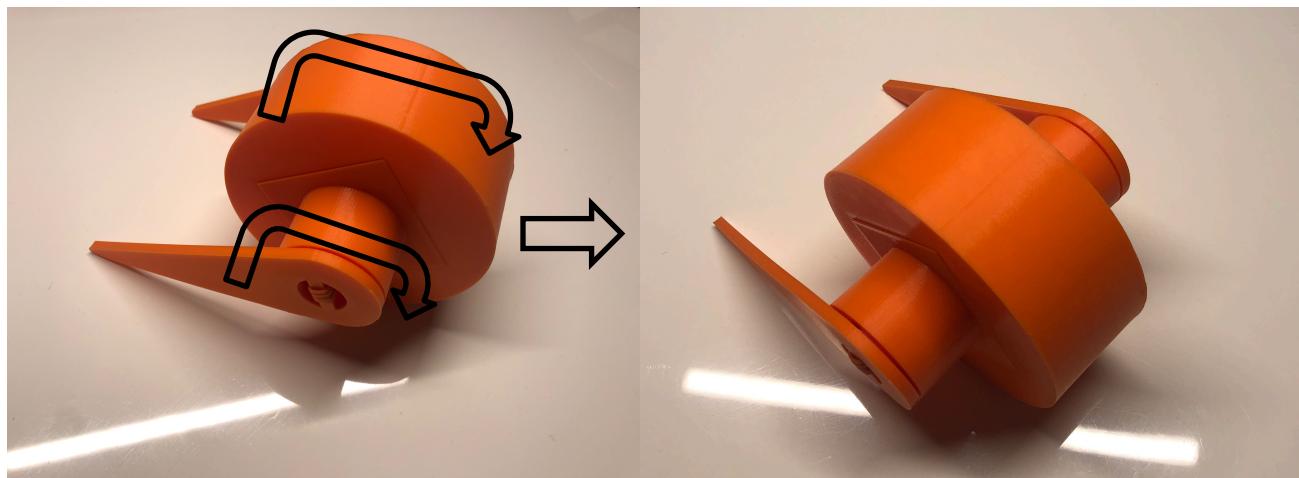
Solid model of the final assembled device “The Wheel Roller”.
